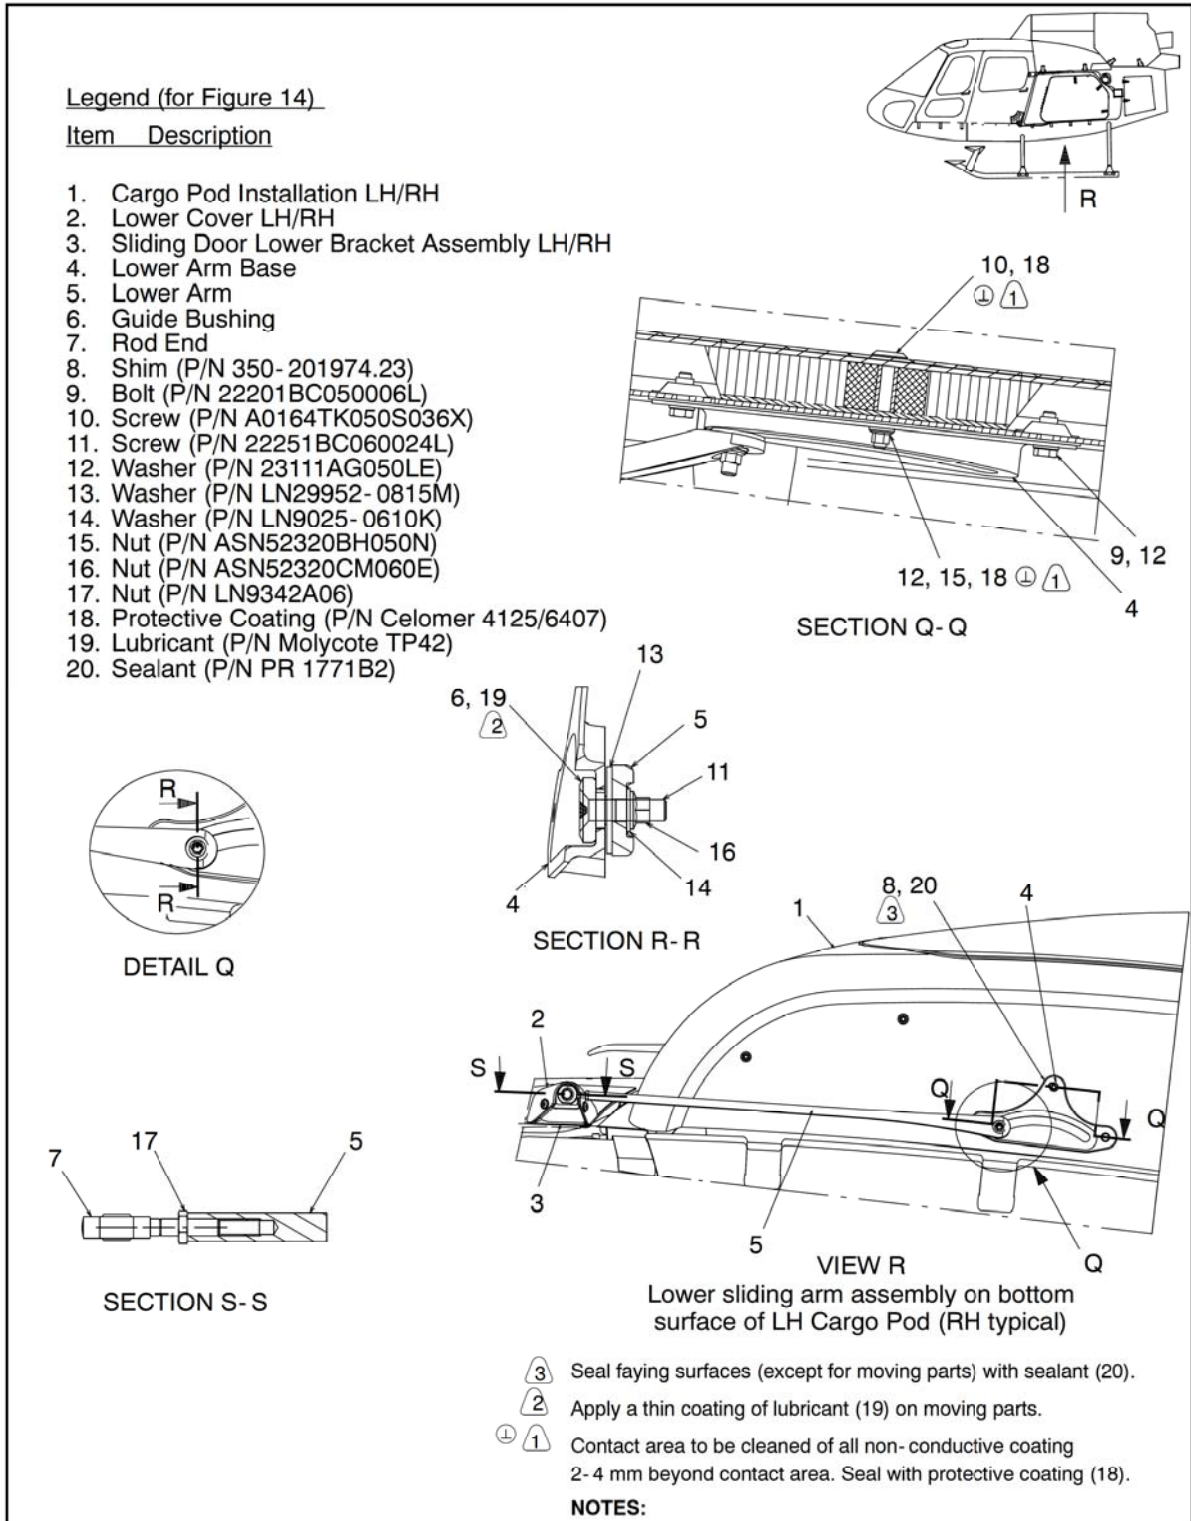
Sliding Door Installation - Sliding Door Lower Arm Assembly
